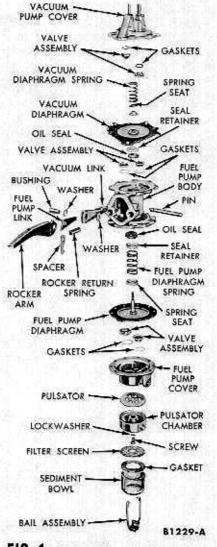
352 Engine Combination Vacuum Booster and Fuel Pump
